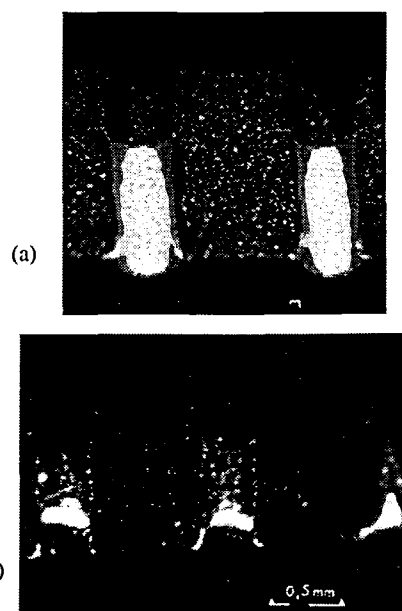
Photographs before and after solderability testing. (a) Gold finish. (b) Best side for solder flow. Note the rough speckled gold finish within the castellations and, after solder dip, the non-uniform solder fills.
